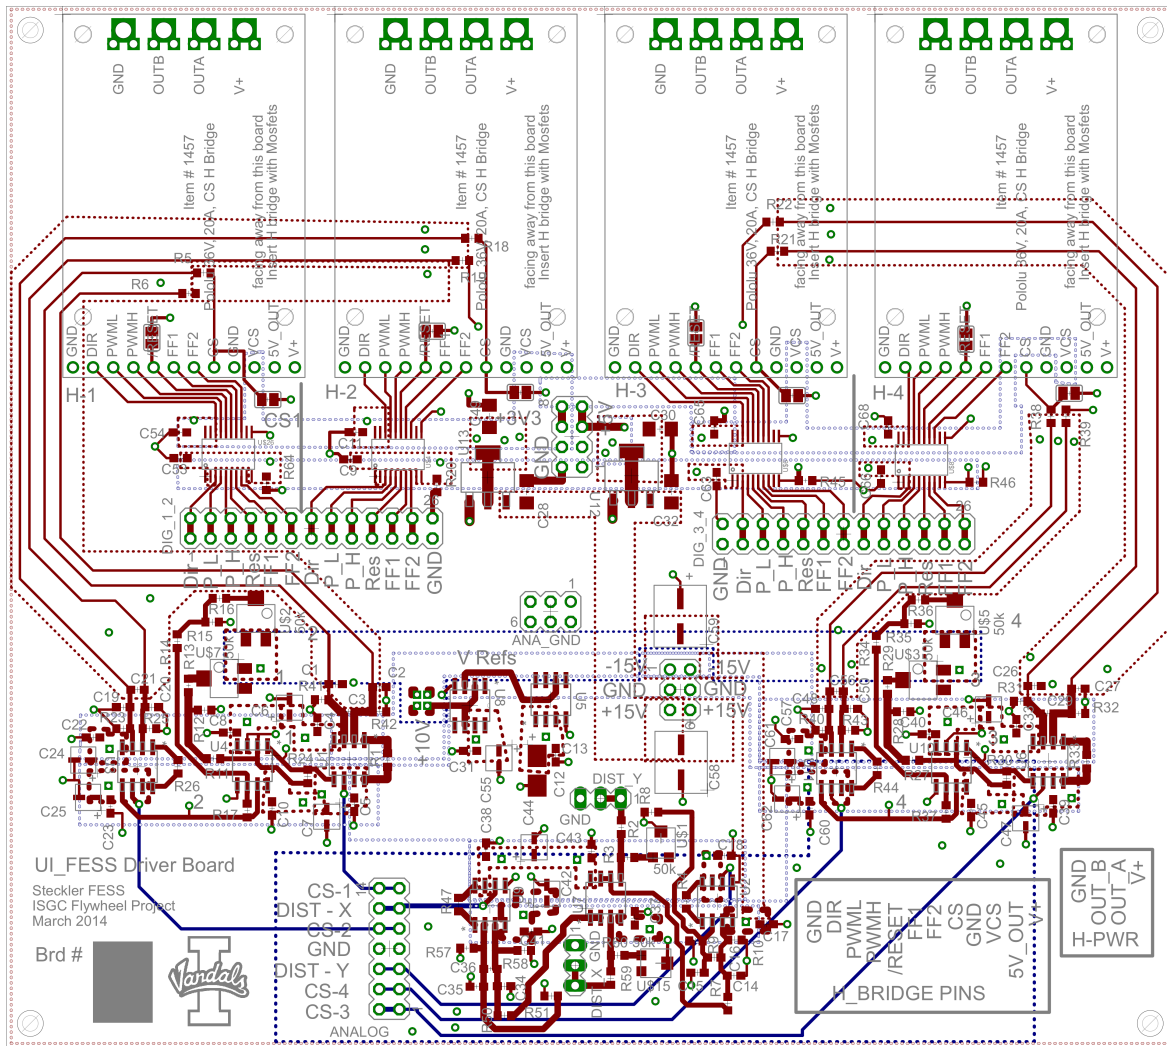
Multilayer View of UIFESS Driver PCB Version 2
